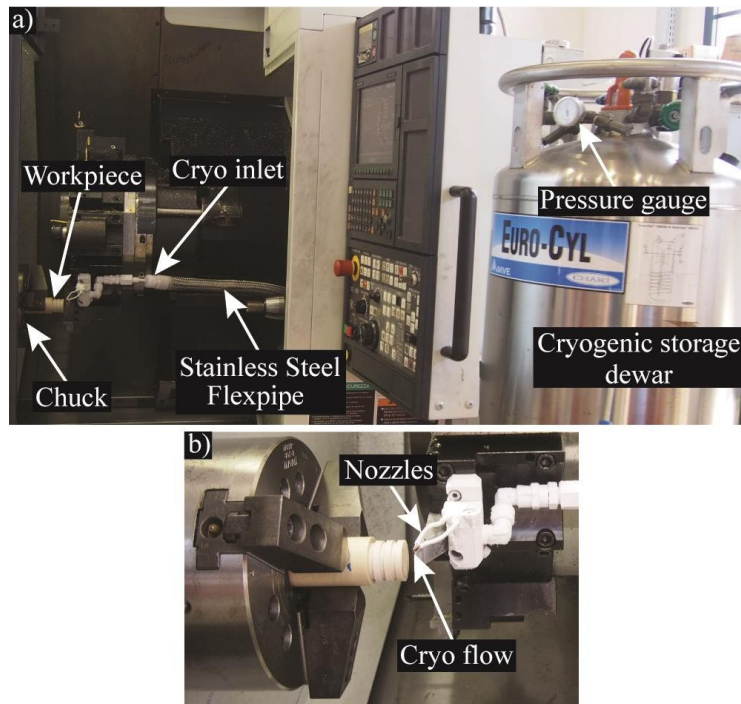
(a) Machining setup; (b) Closer view of the cutting zone when applying cryogenic cooling.
